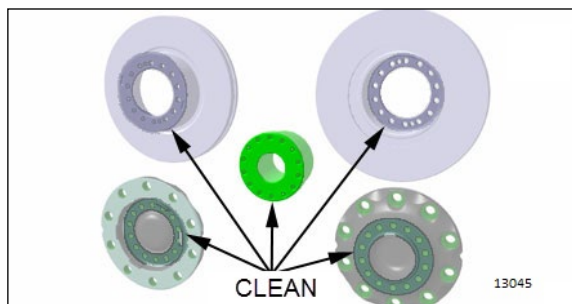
CLEANING HUB BEARING, ROTOR AND HUB FLANGE CLAMPING SURFACES
